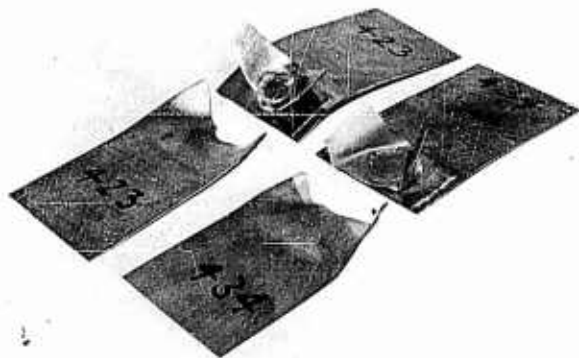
Tensile shear tests of explosive spot welds in lap joints No. 423 copper to copper; No. 434 steel to copper
